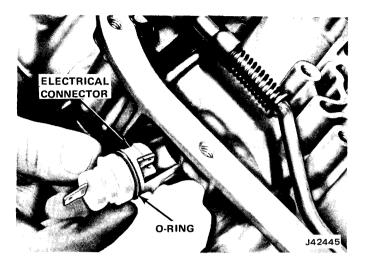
Removing—Installing Electrical Connector and O-Ring
